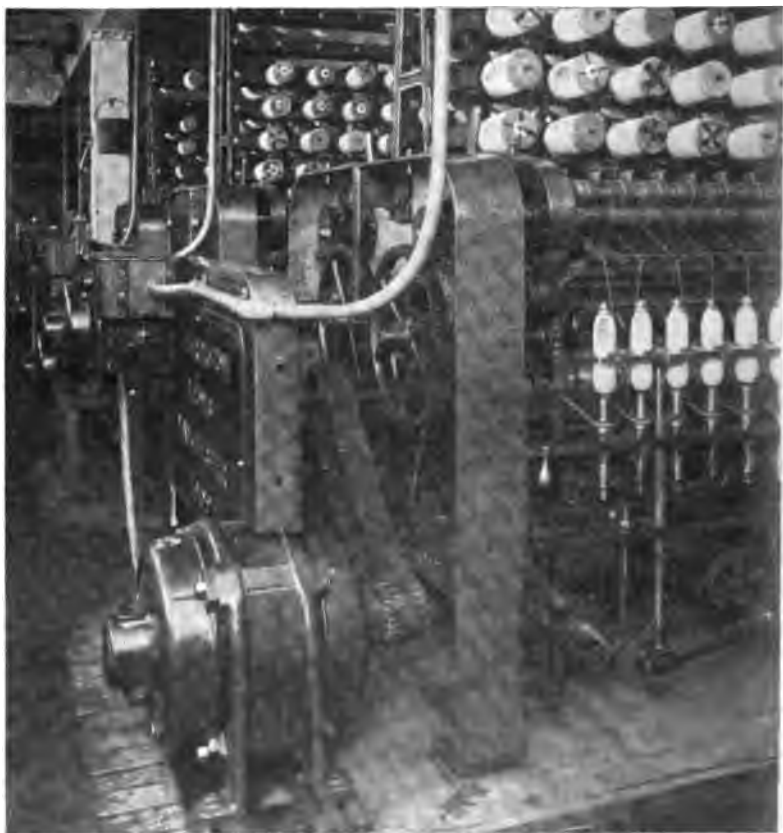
SEC. 10rr.—180 spindle twister frame driven by electric motor.
